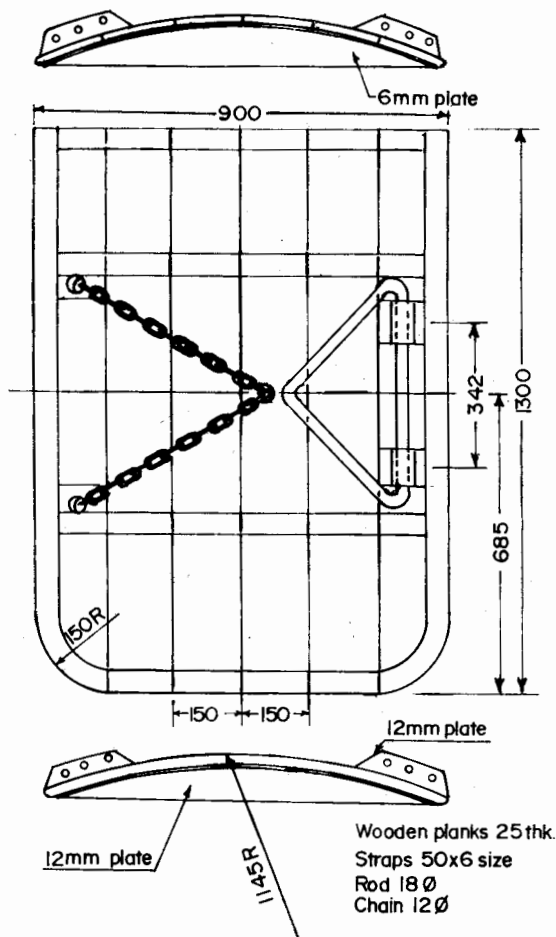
Construction drawing of 1300x900 mm rectangular cambered high aspect ratio otterboard. All dimensions are in millimeters.
